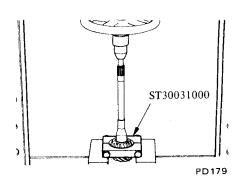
Removing Pinion Rear Bearing Inner Race
